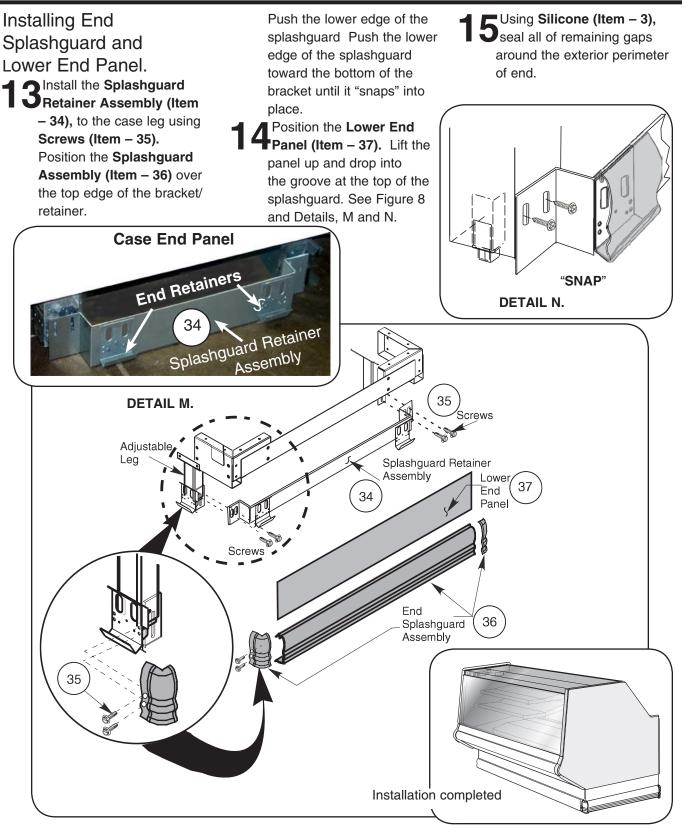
Installing End Brackets, Retainers Splashguard and Lower Panel
